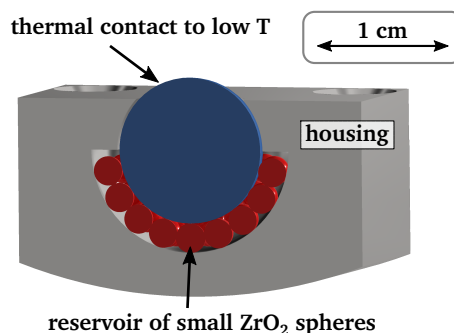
Half section view of the ball transfer units for weight support and minimal heat transfer. The lower surface of the housing is rounded to fit the inner diameter of the respective tube.
